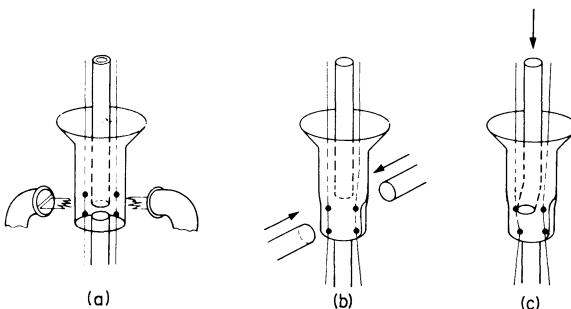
Stages in forming a stem: (a) parts of the stem; (b) parts fused together; (c) stem, after compression and blowing-off of the exhaust tube connexion
